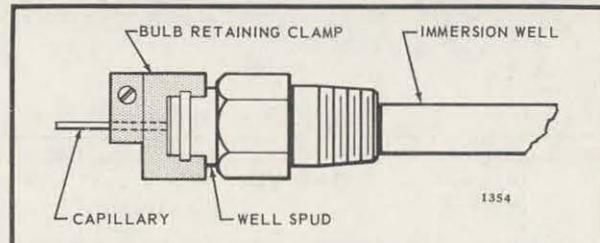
IMMERSION WELL ASSEMBLY FOR MOUNTING SENSING BULB.
